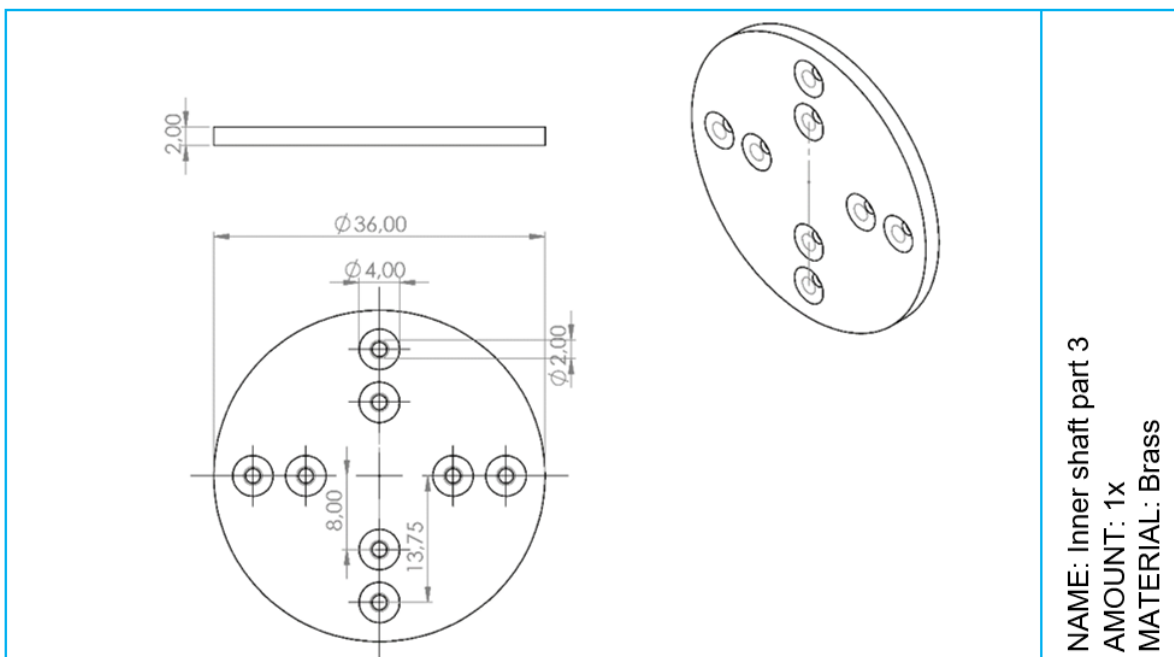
Construction drawings of the inner shaft part 3 - Machined prototype
